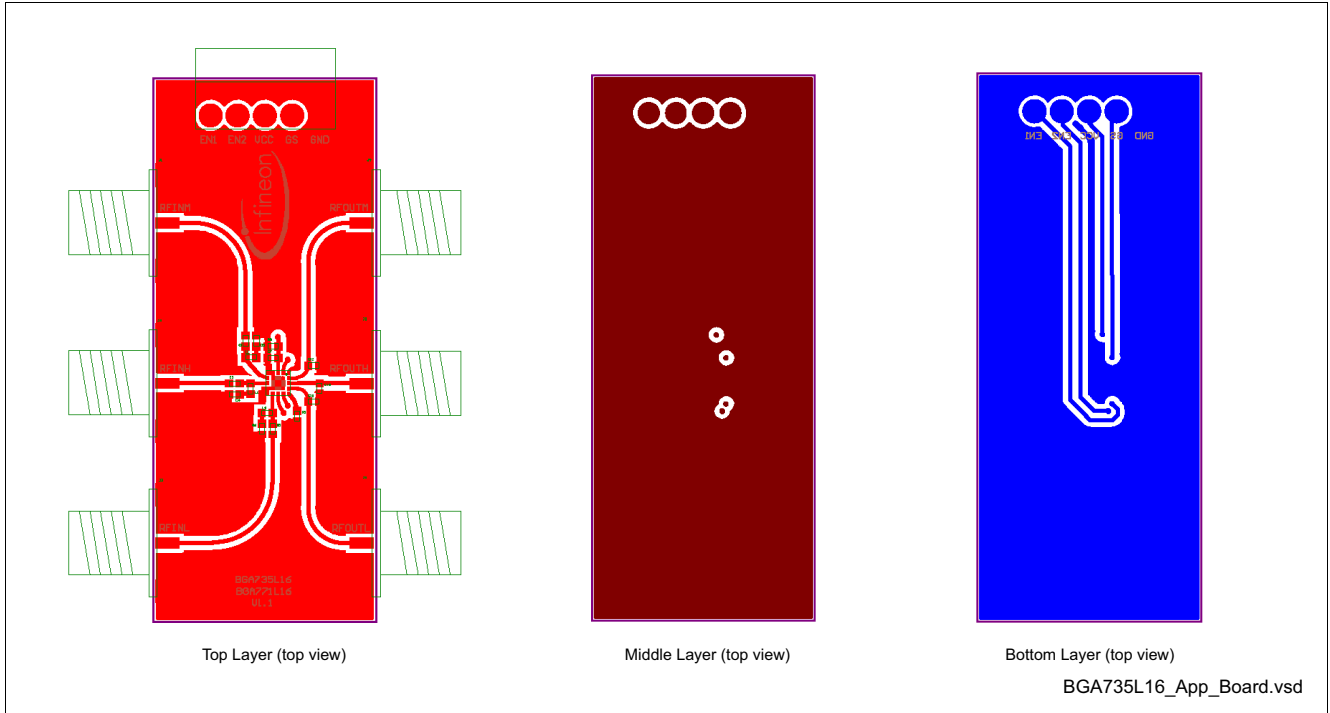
Application board layout on 3-layer FR4. Top layer thickness: 0.2 mm, bottom layer thickness: 0.8 mm, 17 μm Cu metallization, gold plated. Board size: 21 x 50 mm
